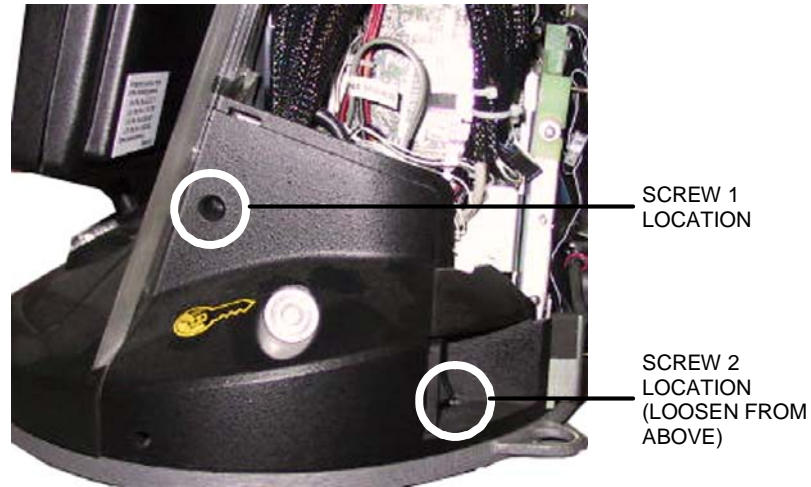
SIDE VIEW OF LEFT WING HIP
